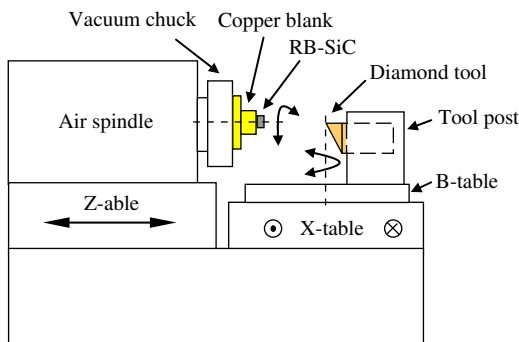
Schematic diagram of the ultraprecision machine tool used in cutting experiments.
